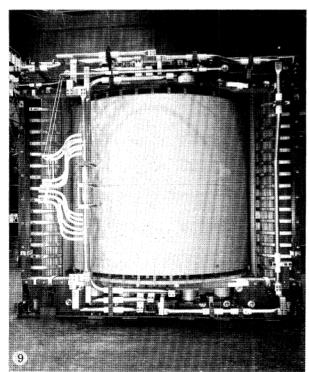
Core and coils of single-phase transformer fitted with horizontal magnetic shunts.
